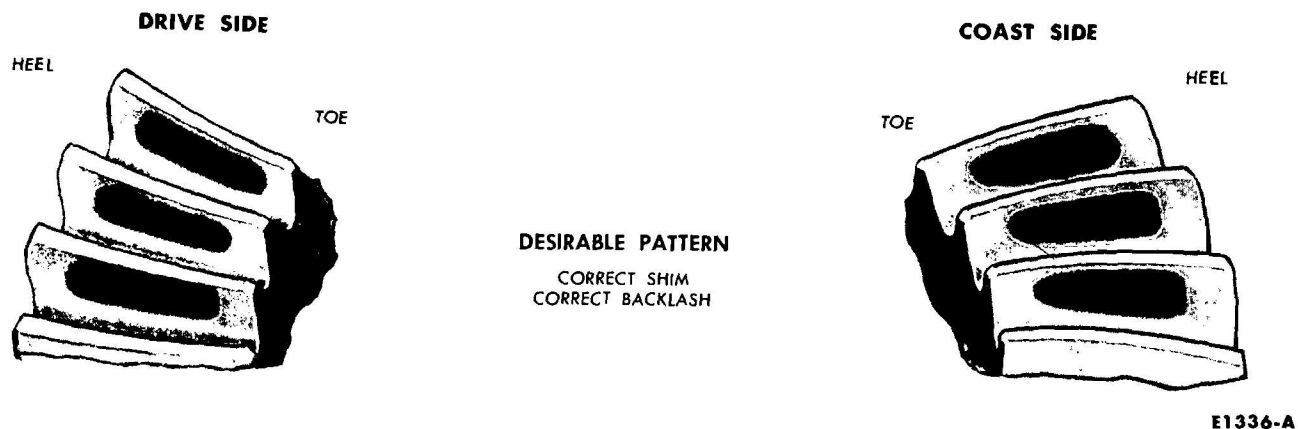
Ideal Tooth Pattern—Removable Carrier Type Axle
